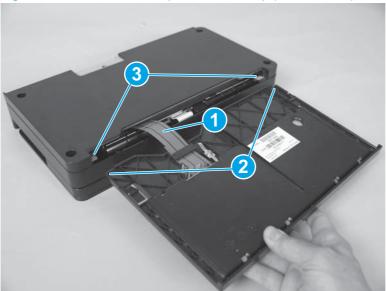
Remove the keyboard assembly (M880; 7 of 7)
